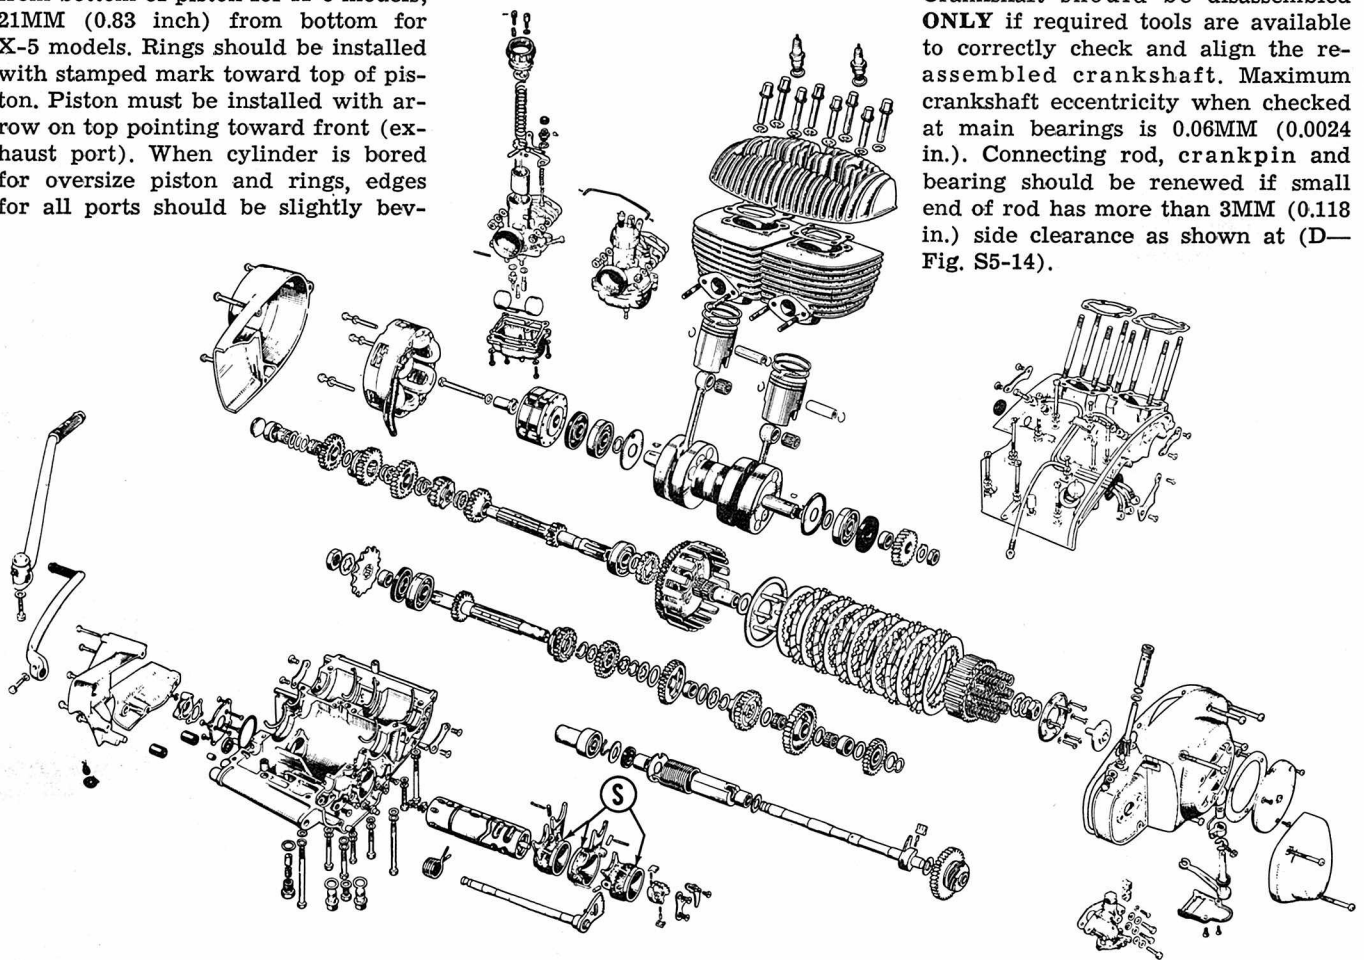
Exploded view of the X-6 engine and transmission assembly. Flanges (S) on shift forks should be on side shown by arrows.
